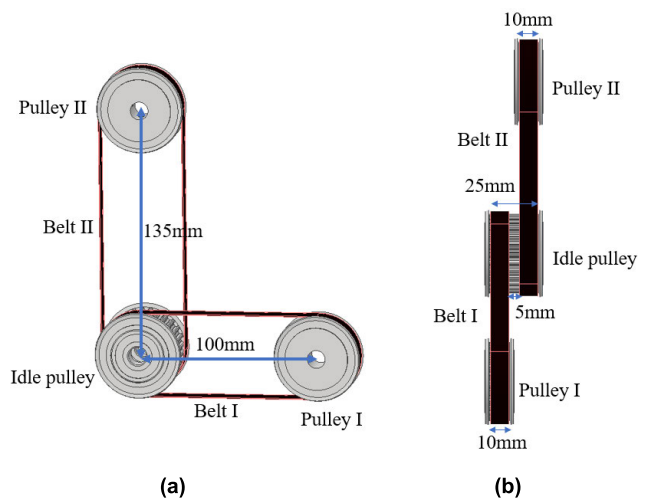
Assembly diagram of pulleys and belts: (a) Front view; (b) Side view.
